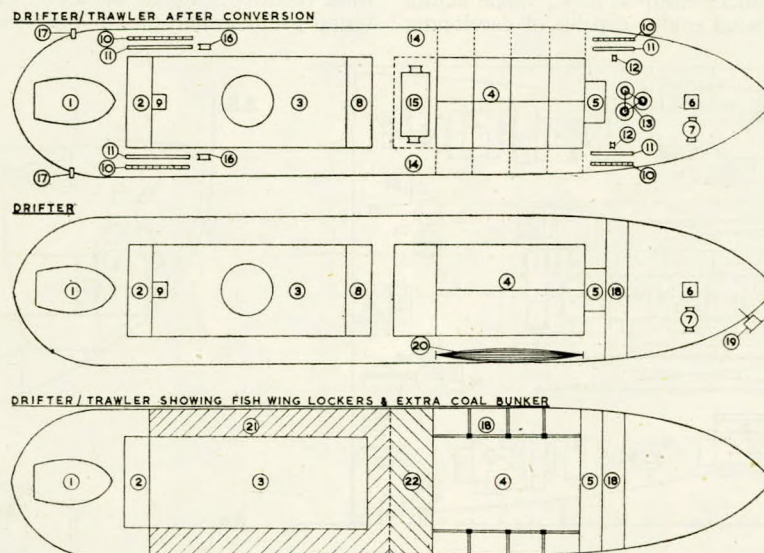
Diagram showing the layout of gear on a drifter/trawler before and after conversion
